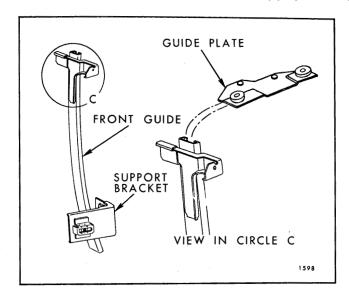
Front Guide and Guide Plate - 68069-68169 Styles
